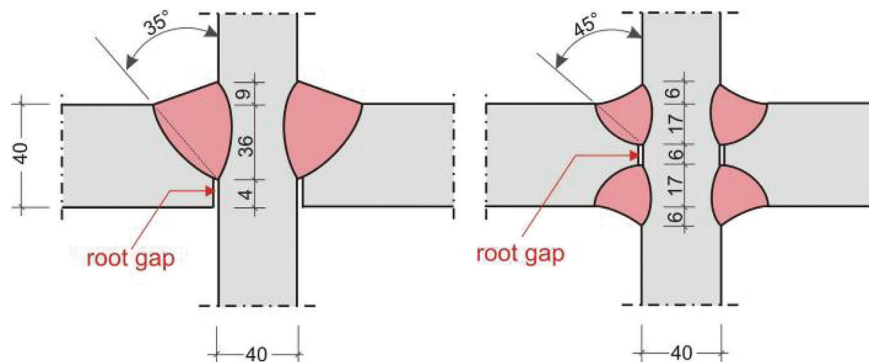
Butt welds with root gaps (dimensions in mm). (Figure courtesy of Professor Markus Feldmann)
